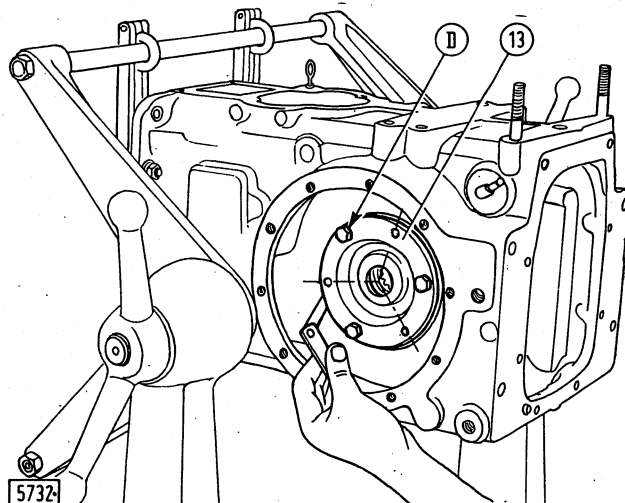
Measuring the clearance (L, fig. III/15) with a feeler gauge.
